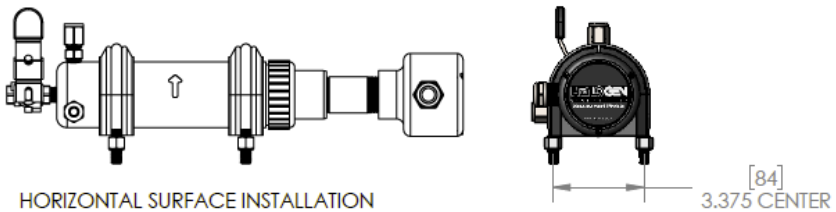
Chamber installation on a horizontal surface. Also shown is width between mounting holes
